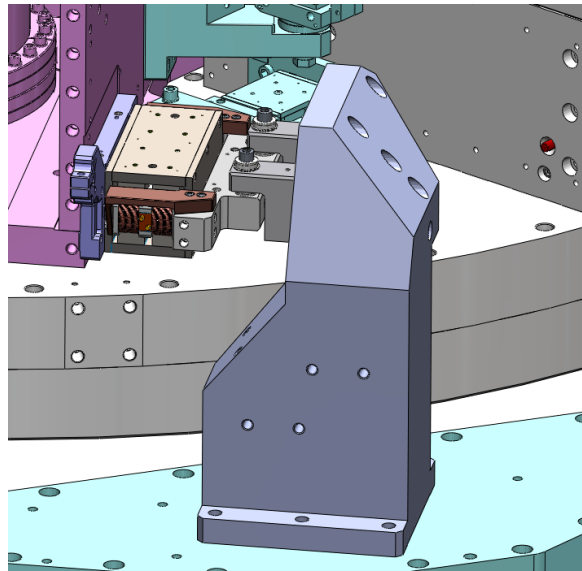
D0901102 Stage 0-1 Horizontal Actuator Assembly installed on D0901541 Actuator Post
